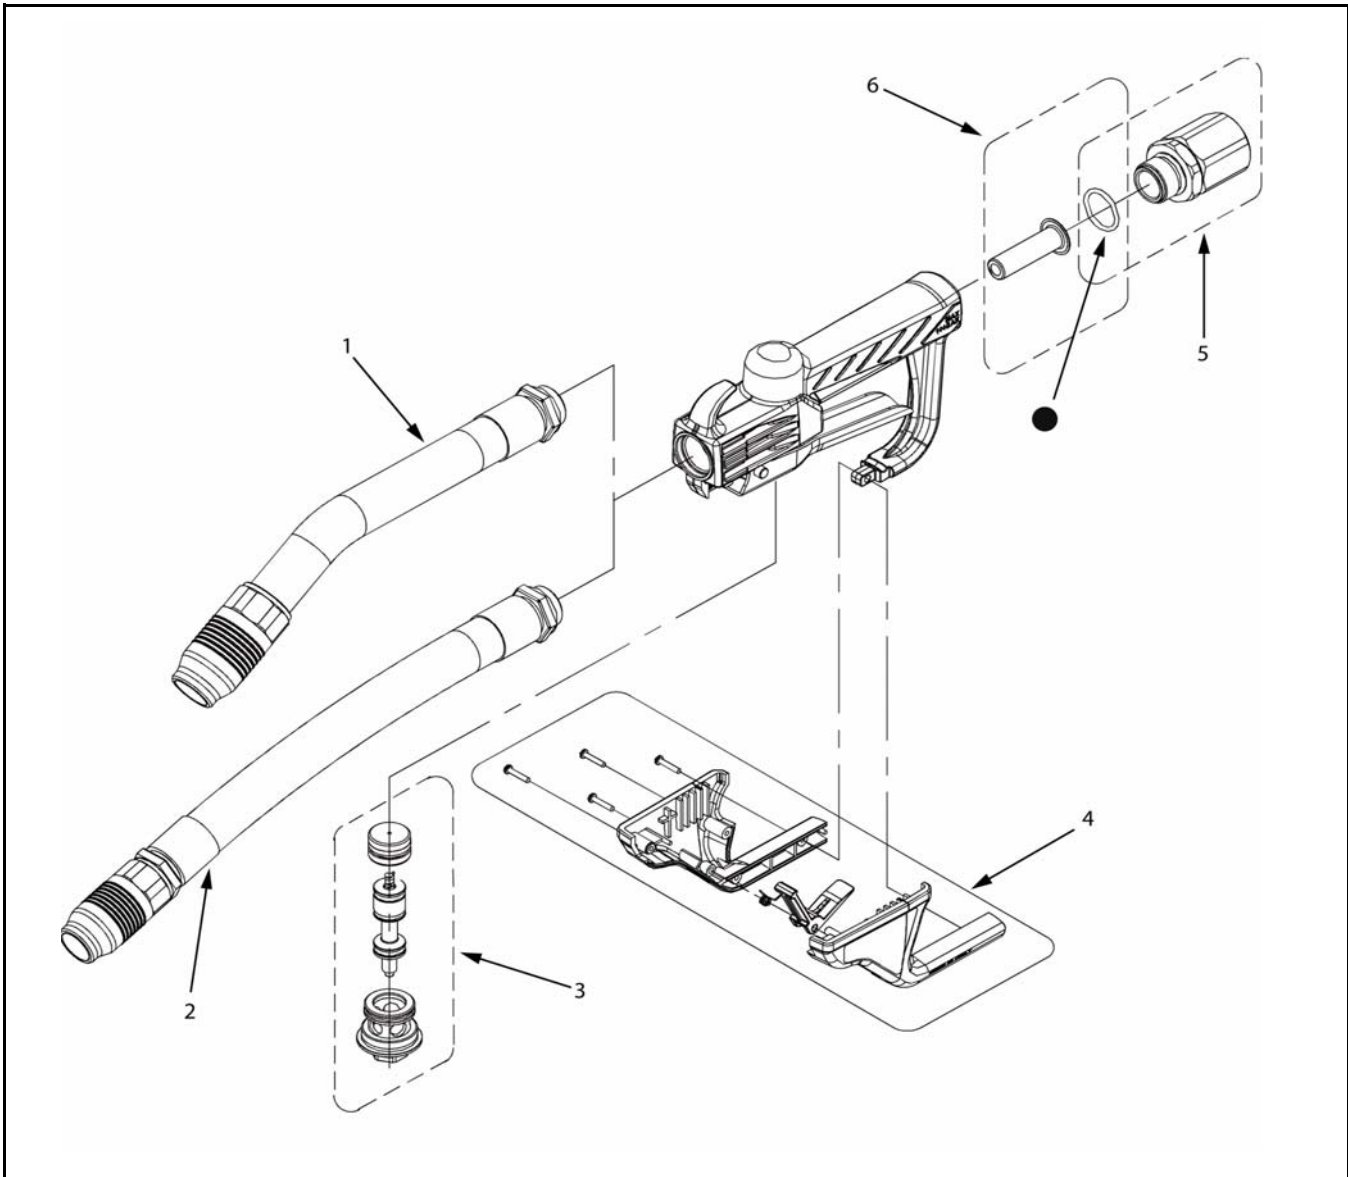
High Volume Control Valve Model 3572 Series - Exploded View
